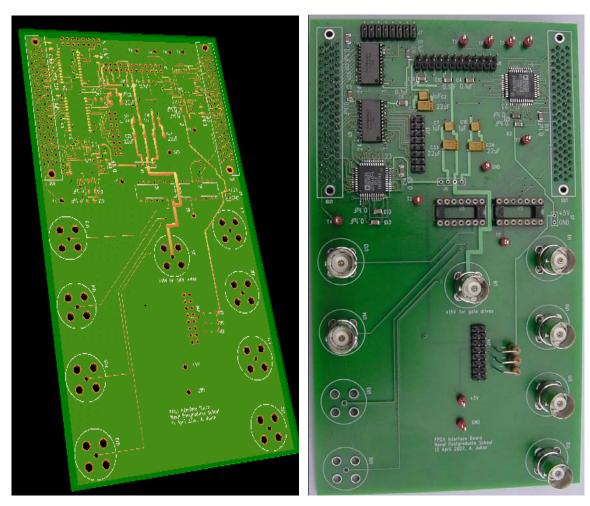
PCB123® 3-D View and Photo of Power Source Interface PCB.
